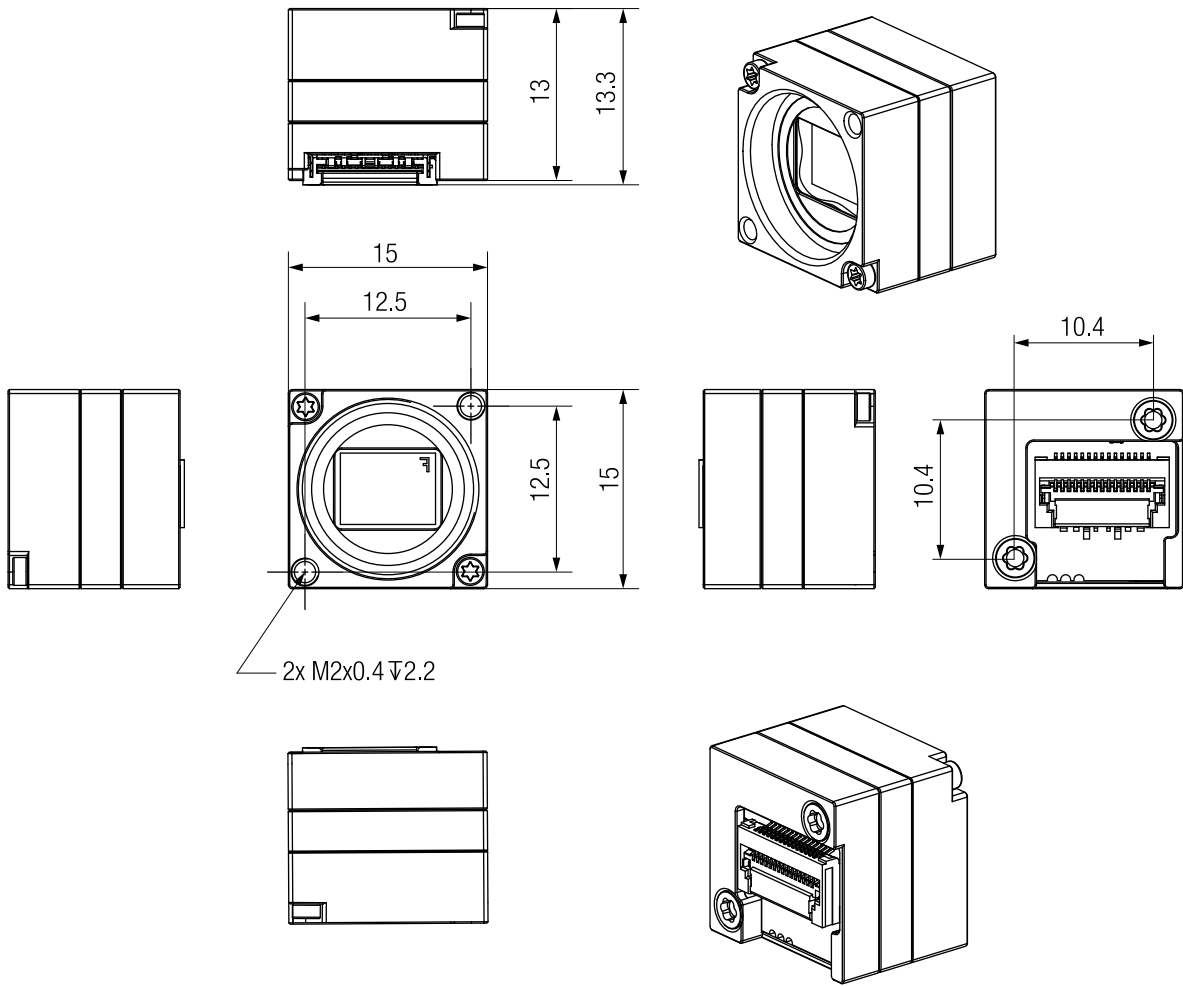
Dimensional drawing of MU196xR-ON with ADPT-MU-CX3-FL adapter
